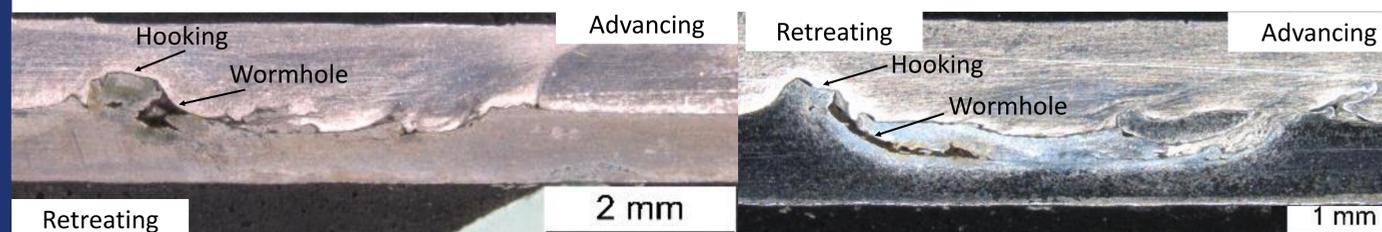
Welds 66 and 67 macrographs respectively
